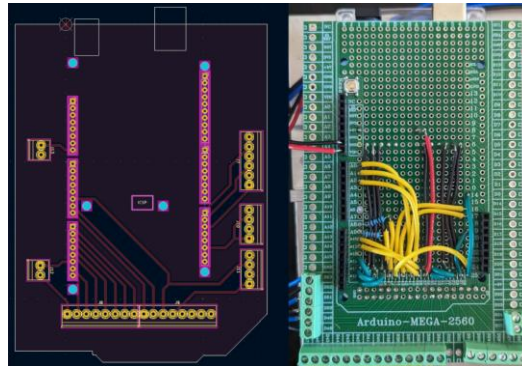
Arduino Shield PCB and Hand Soldered Equivalent
